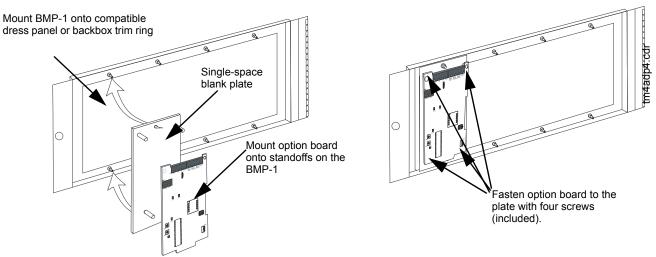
Mounting an Option Board onto a Dress Panel with BMP-1 (ADP-4B Shown)
